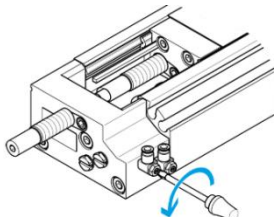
OPEN THROTTLE CHECK VALVE
